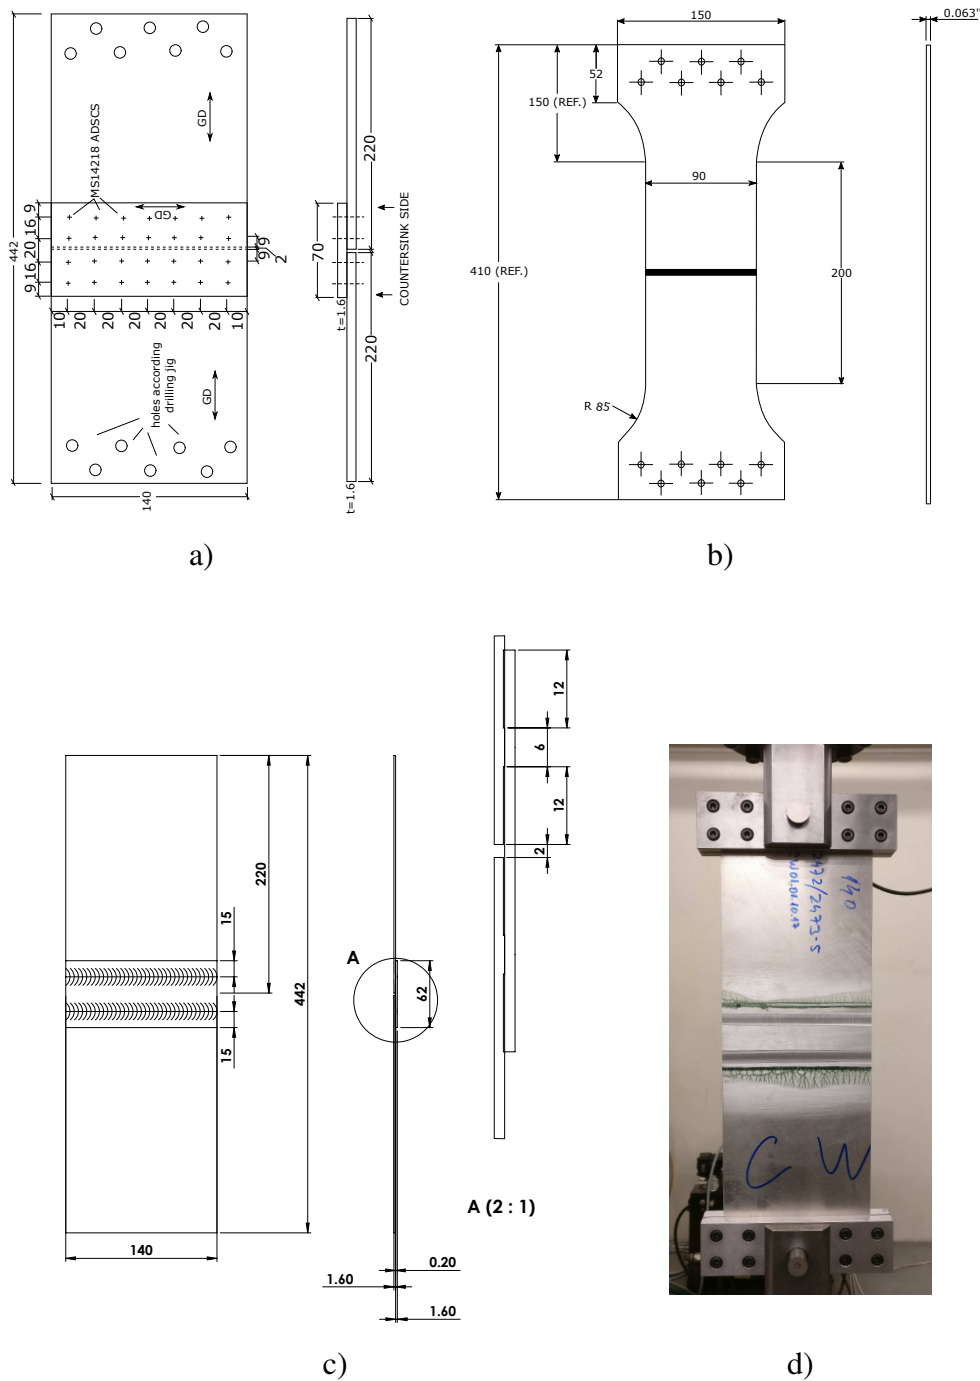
Longitudinal joints specimens geometry: riveted a), FSW b), FSW+AB c) and specimen photo d).
